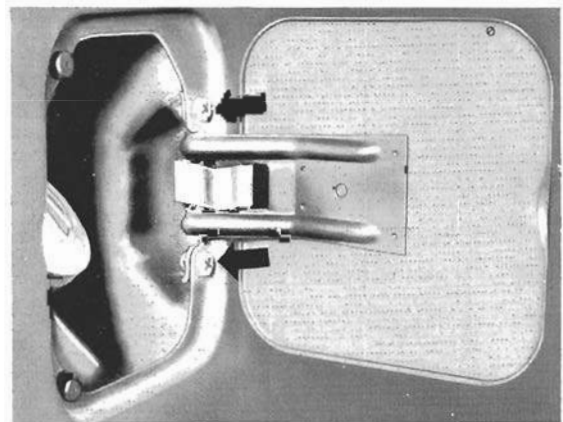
Screws (arrows) that hold fuel filler flap.
